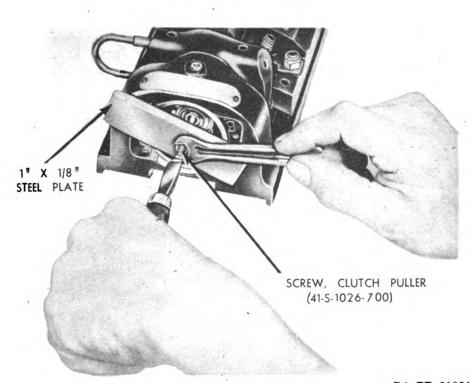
20-mm feed mechanism M3—Extracting needle bearing from feed wheel shaft.
